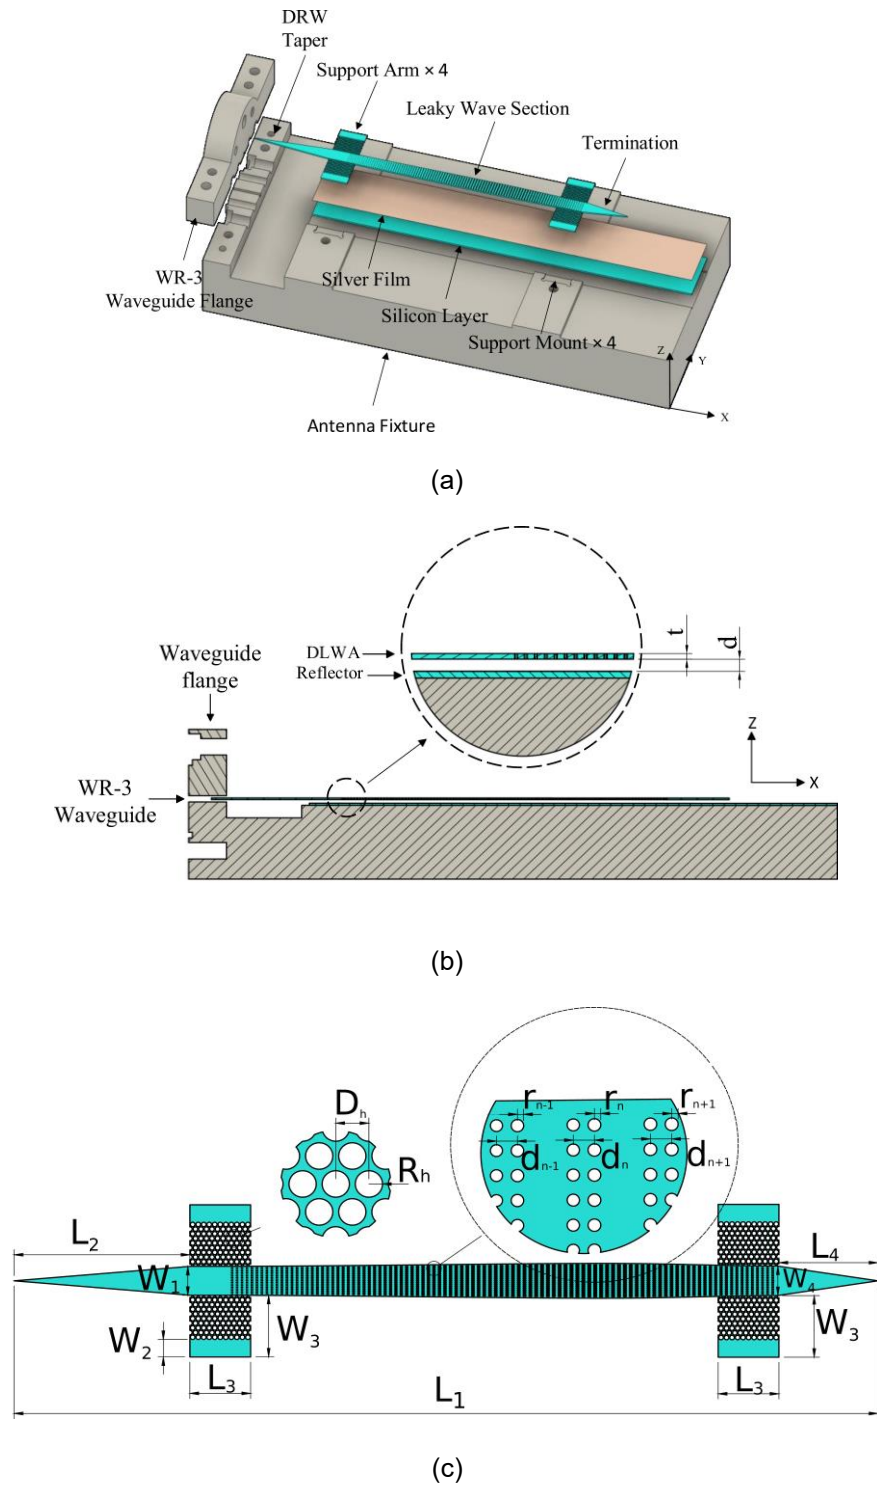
Full design of the DLWA. (a) Exploded view of the DLWA and antenna fixture. (b) Cross-section of fixture, reflector and DLWA. (c) Antenna unit cell and support arm details.
